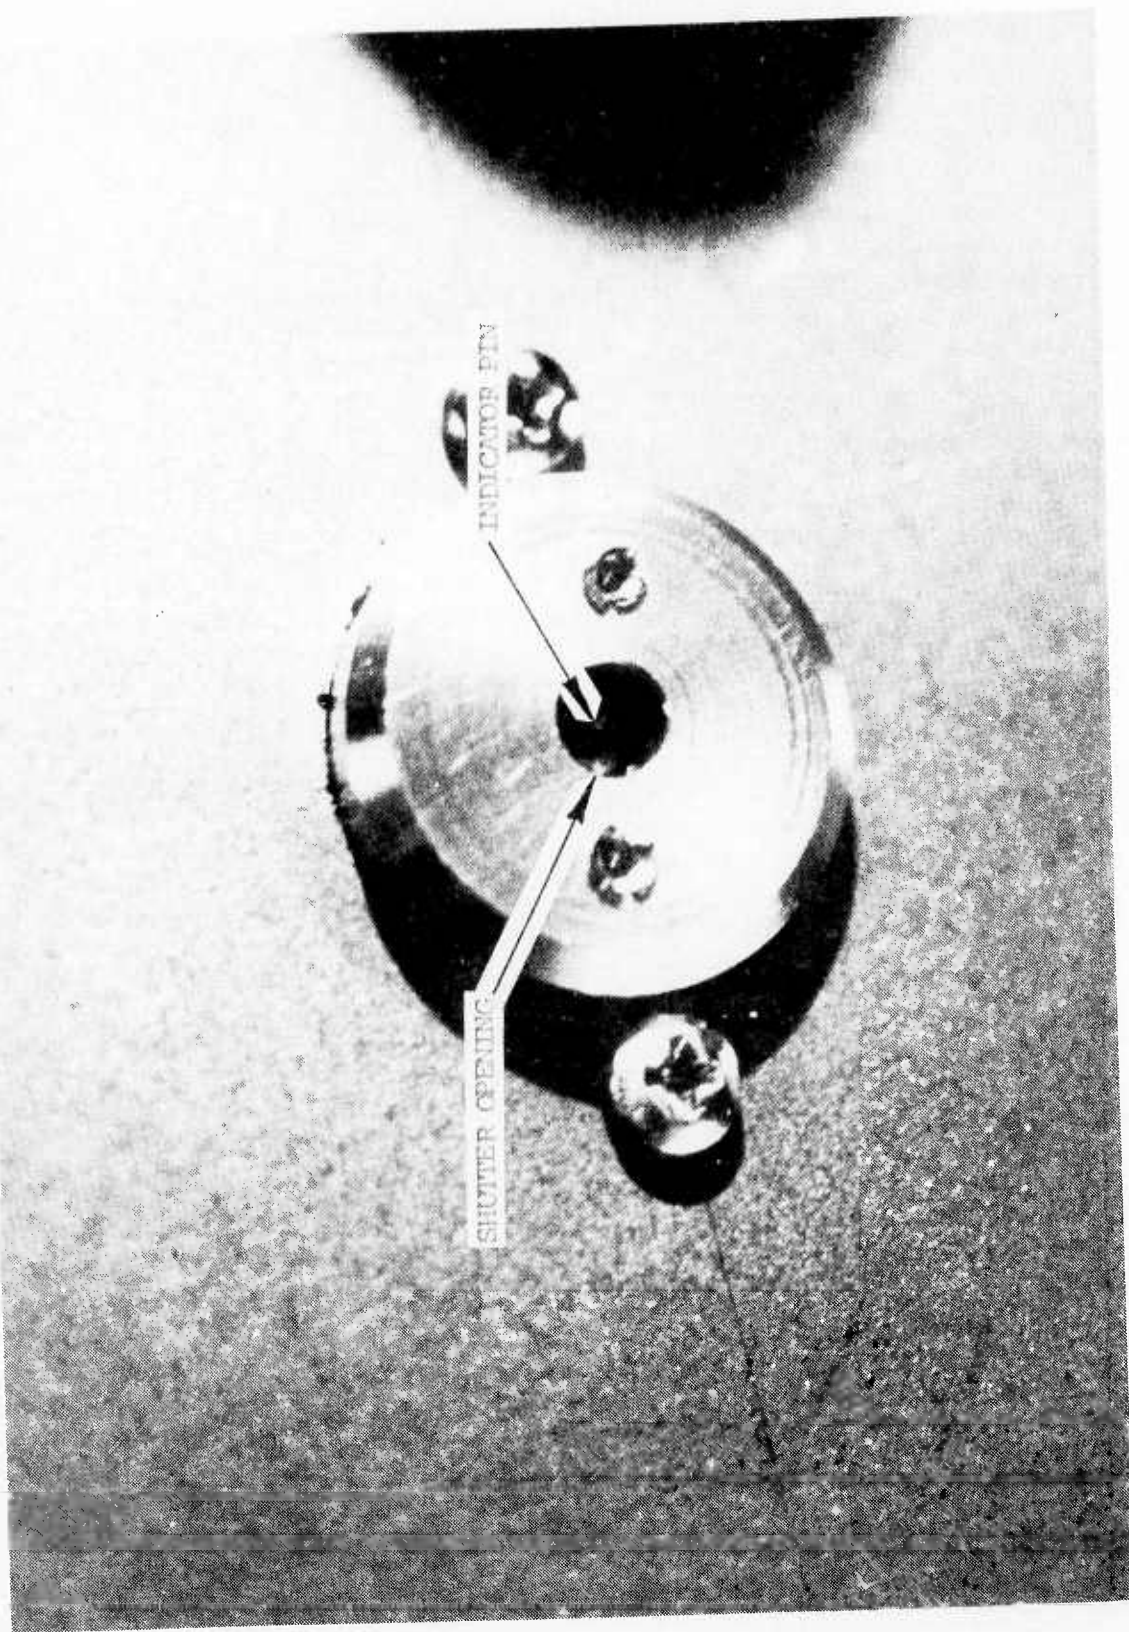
S&A Mechanism Turbine Hub with Shutter Open, Pin Partially Extended
